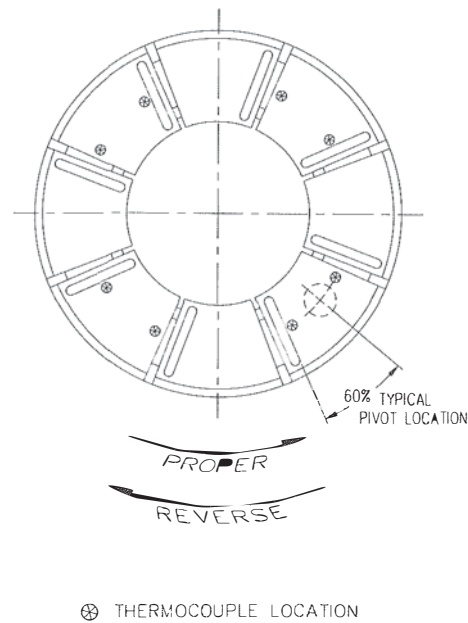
Thermocouple location in the reverse rotation LEG thrust bearing
